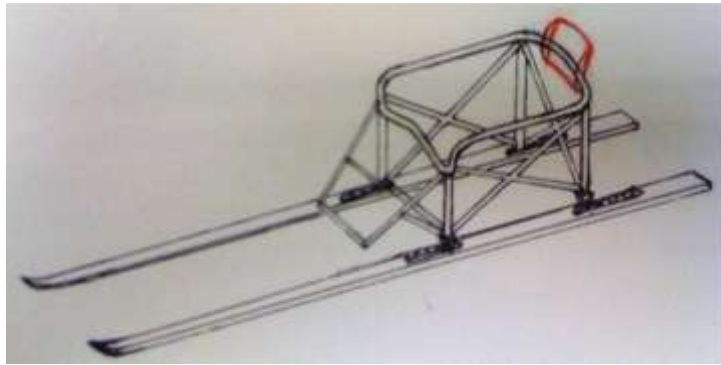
Space Frame concept design sketch. Composed of welded aluminum tubing and a cloth seat (not shown).
